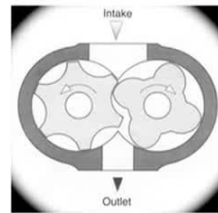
Cross sectional view of Screw Compressor with unsymmetrical profiles [Ref. 1].
